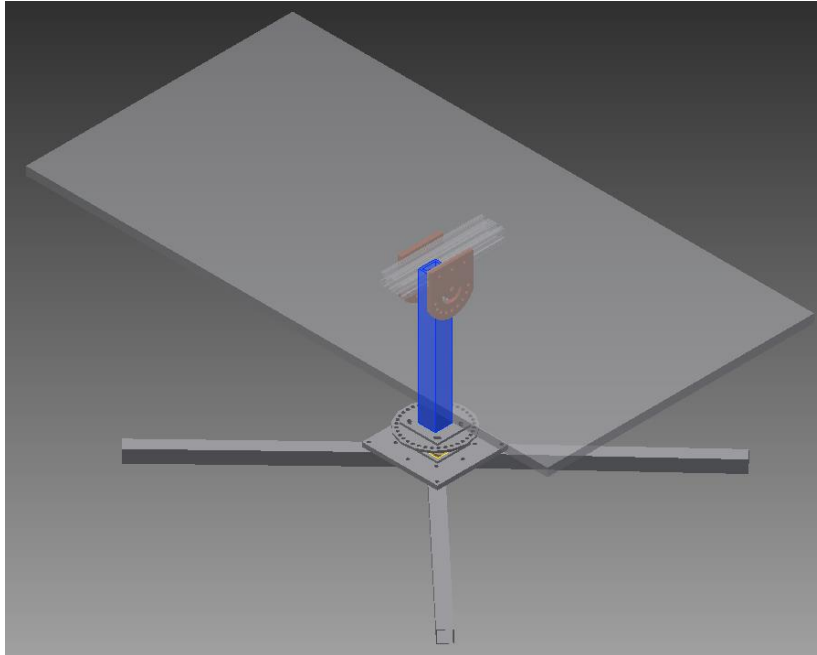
The final assembly draft. The final assembly of the mechanical system generated with Inventor Autodesk.
